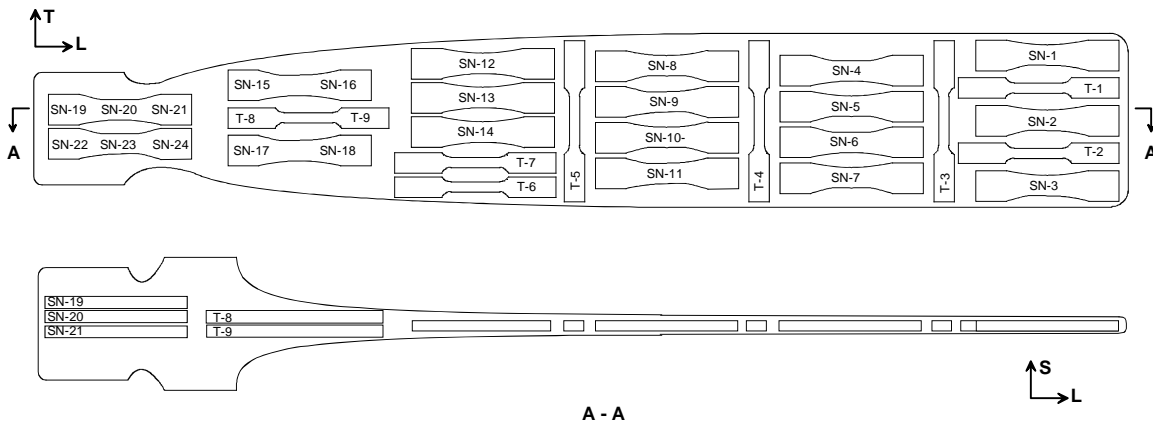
The Location and Orientation of Tensile and Uniaxial Fatigue (S-N) Specimens, With Respect to the Propeller Spar Forgings, Shown Schematically for Blade 4
